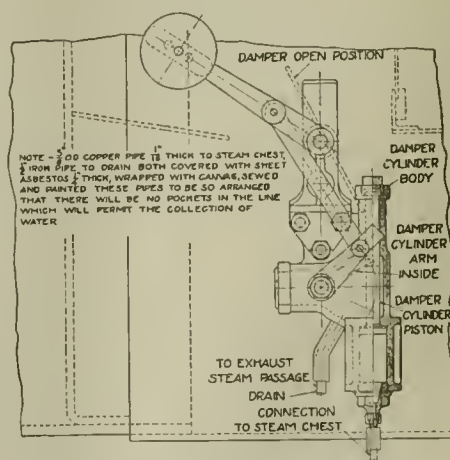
DAMPER OPEN, DETAILS OF RIGGING AND METHOD OF PIPE LAGGING.
